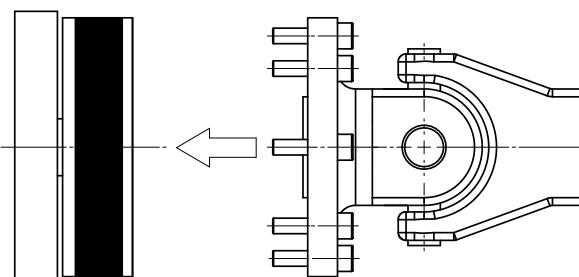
Coupling Mounting to Measuring Flange (TF 309, 310, 311 and 220)
